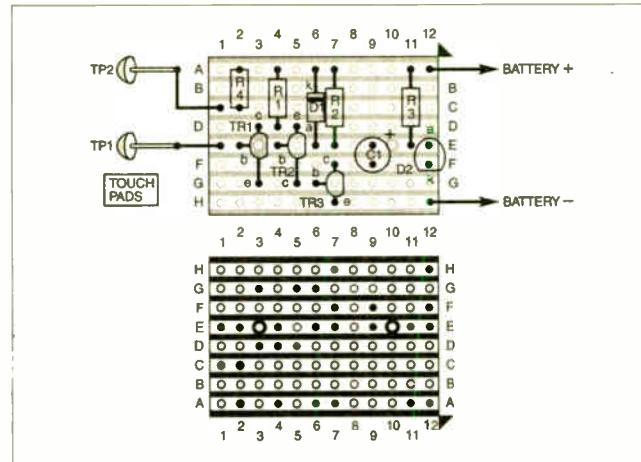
Stripboard component layout and underside copper tracks showing two cuts in strip E.
